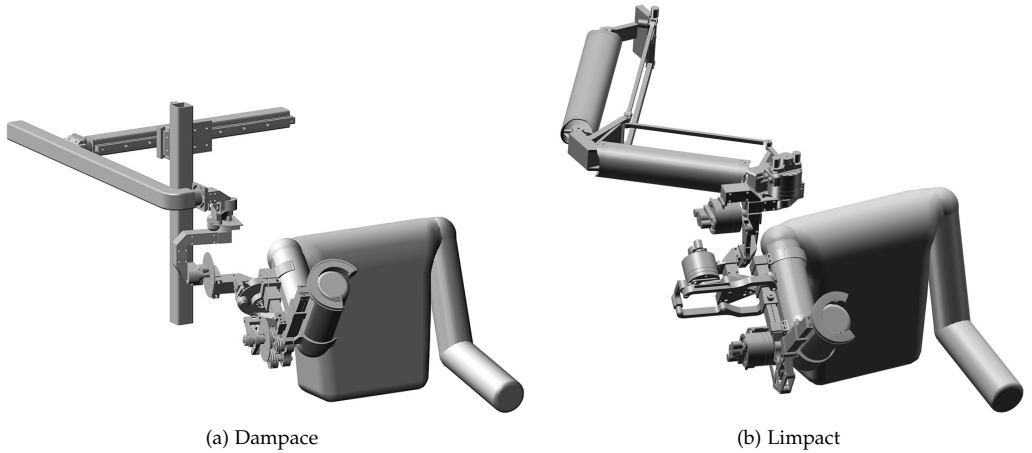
(a) The Dampace exoskeleton [202, also see Chap. 8] has powered hydraulic disk brakes on the rotational axes of the shoulder and elbow. It uses the linear guidance linkage system and the parallel shoulder axial rotation axes. The friction of the first and the high movement amplitudes of the second result in significant impedance during rotation of the self-aligning joints. (b) The Limpace exoskeleton [204, also see Chap. 9] uses rotation hydro elastic actuators on its shoulder and elbow joints. With the lessons learned from the Dampace, it uses the double 3D parallelogram linkage mechanism and the external rotation center mechanisms at the shoulder axial rotation axis. The cabled design of the elbow joint of the Dampace has been replaced by a push-pull mechanism, which is stronger and requires less maintenance.
